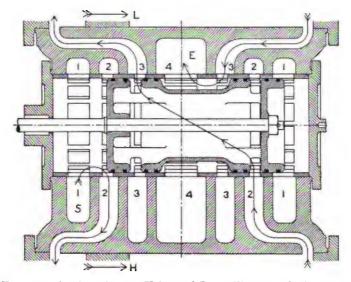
Sections through Valve and Ports, Fig. 256. Scale 1 to 13.
